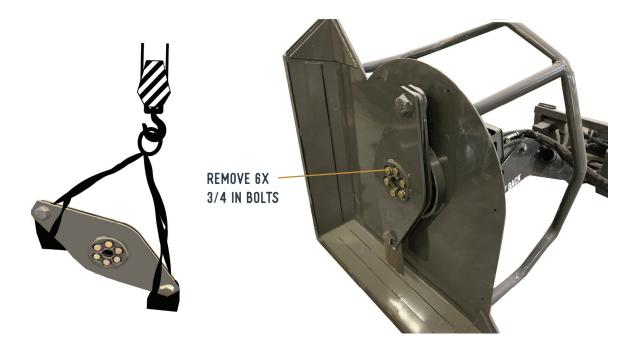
A BLADE HOLDER AND SLING SYSTEM
